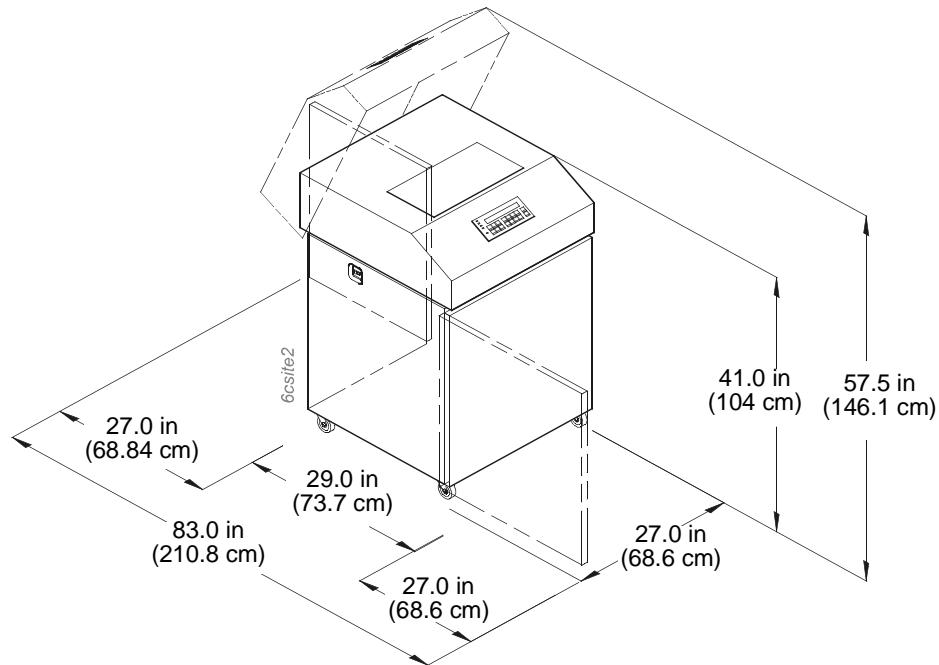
Exploded View Of Cabinet Model Printer Dimensions
